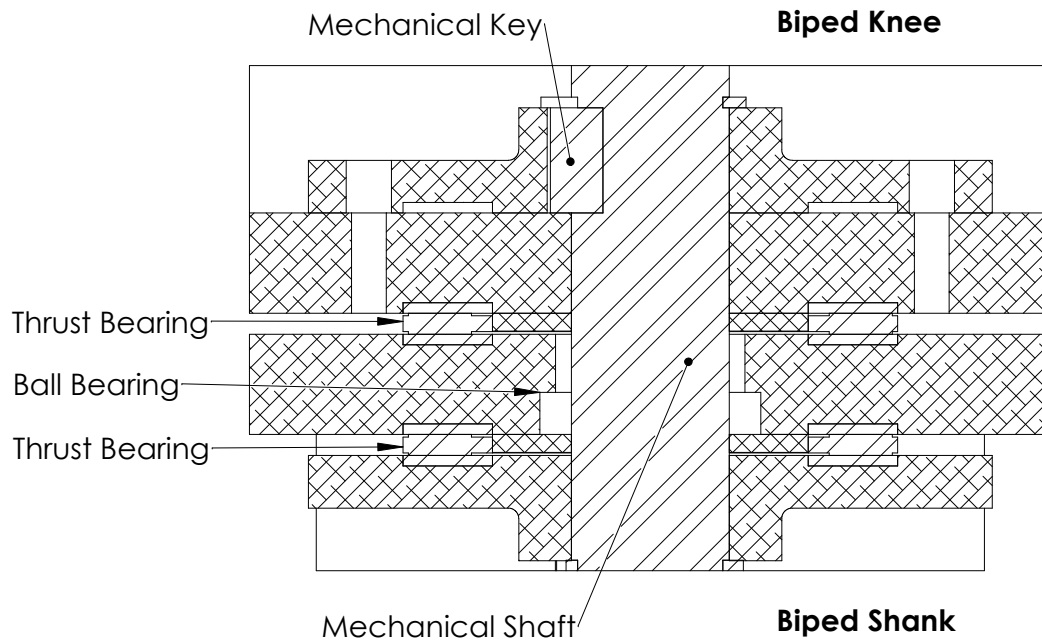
A combination of thrust and ball bearings used for yaw joints to support radial and axial loading.
